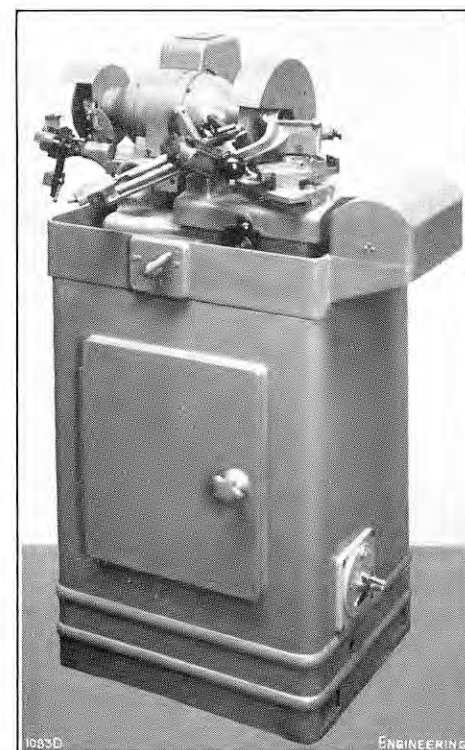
TWIST-DRILL GRINDING MACHINE; MOTOR GEAR & ENGINEERING CO. LTD.
